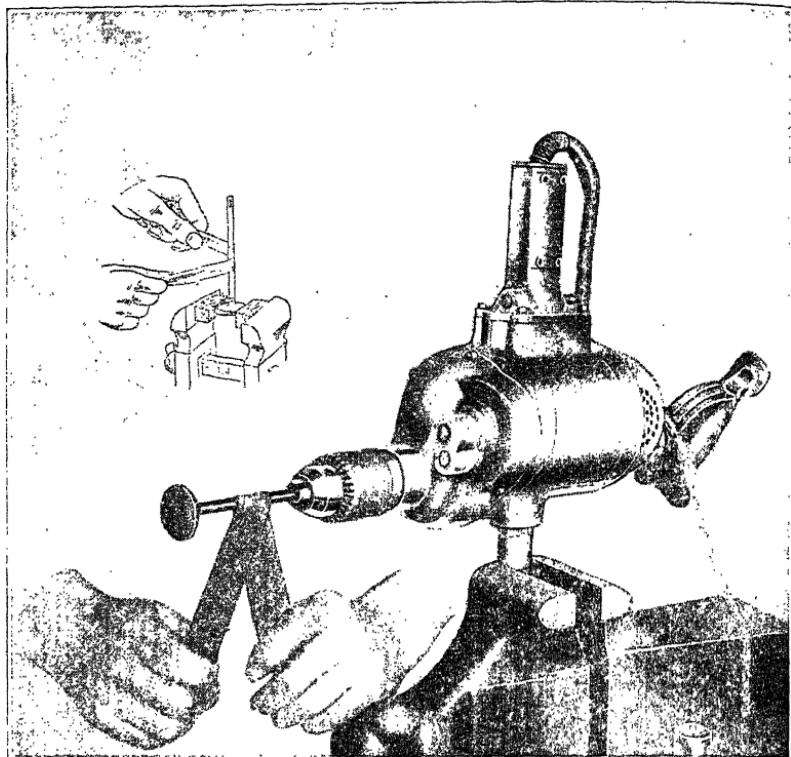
Cleaning Valve Stems with Electric Drill and Emery Cloth
